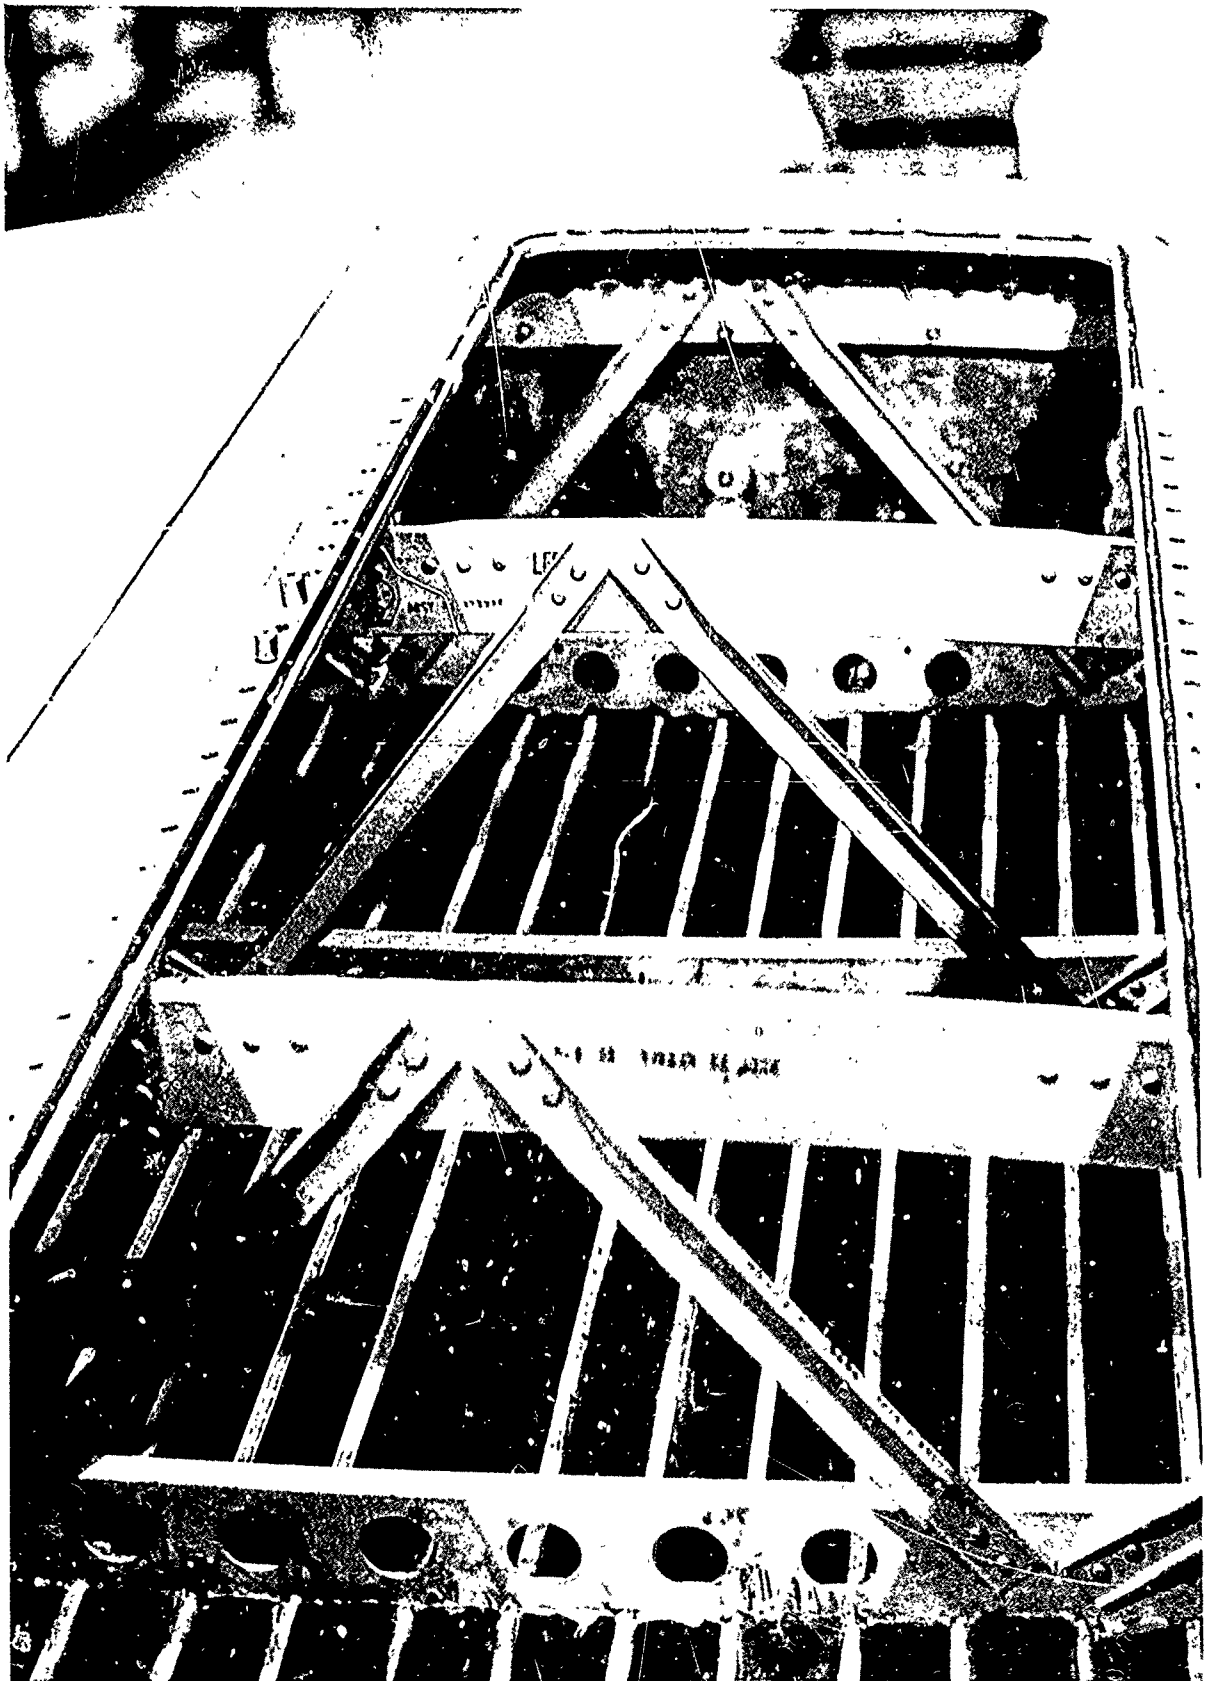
TANK BAYS WITH PRECOMPRESSED FOAM INSTALLED
